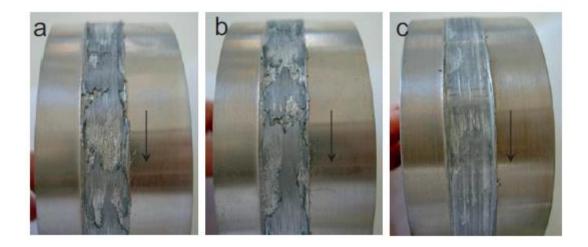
Macrographs of the aluminium cylinders rotated against CAPVD (a) CrN, (b) AlCrN and (c) AlTiN coated hot work tool steel after the sliding wear test. The sliding direction is indicated with an arrow [28].
